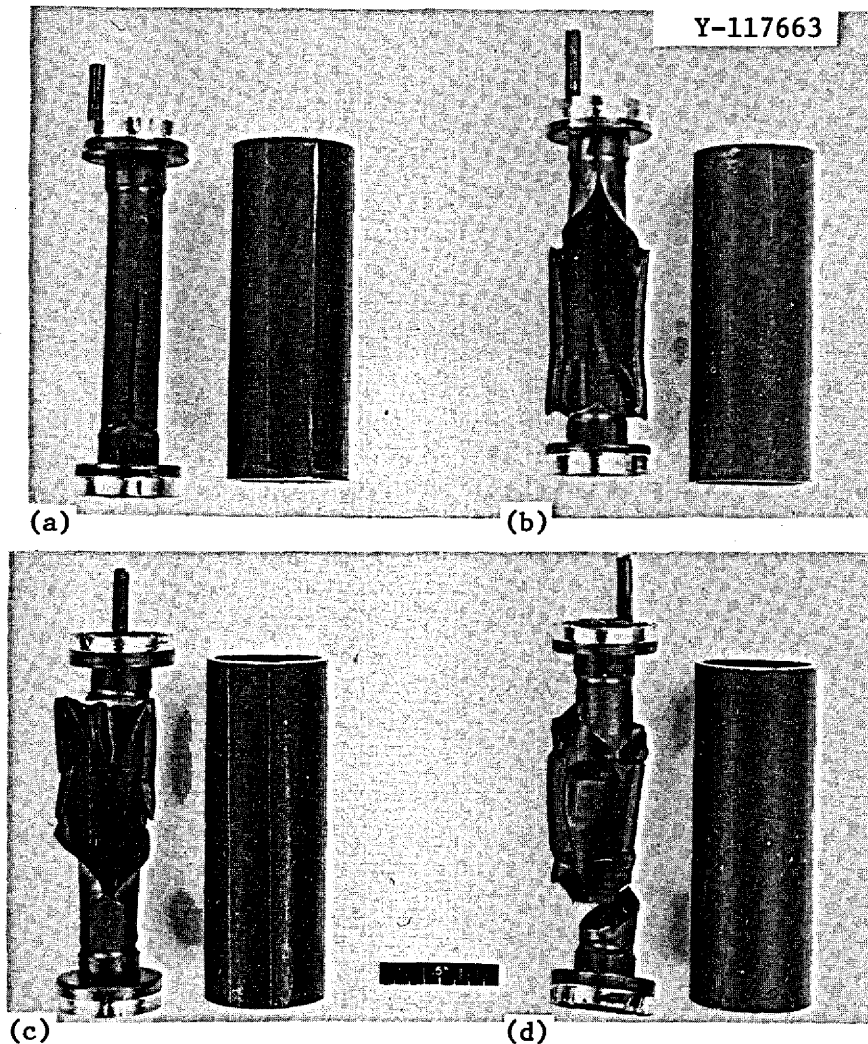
Photographs of Four Specimens Failed in Steam. See Fig. 1 for a schematic drawing of the assembled specimen. (a) SN 64, 340 MPa (49,340 psi), rupture at 2088.75 hr. (b) SN 118, 410 MPa (59,500 psi), rupture at 75.3 hr. (c) SN 111, 441 MPa (64,000 psi), rupture at 28.75 hr. (d) SN 106, 489 MPa (70,940 psi), rupture at 1.65 hr.
